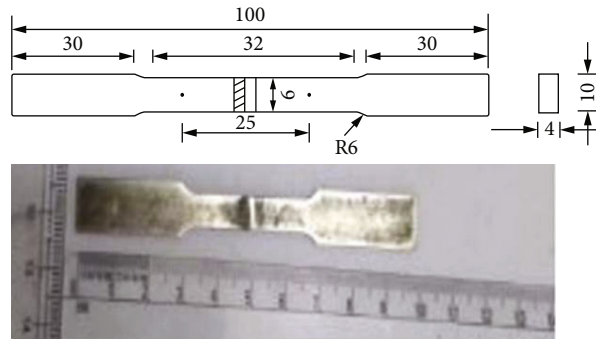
ASTM E8 standard specimen dimensions for tensile testing.
